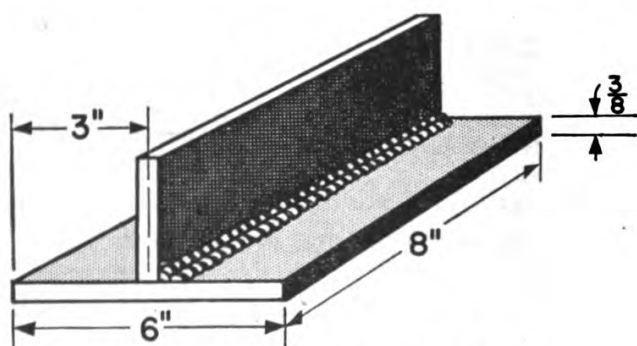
Job 5 ($\frac{3}{8}$ " fillet weld).
